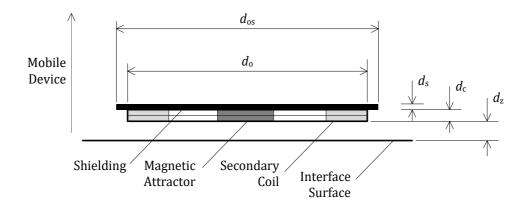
Secondary Coil and Shielding assembly of Power Receiver example 4
